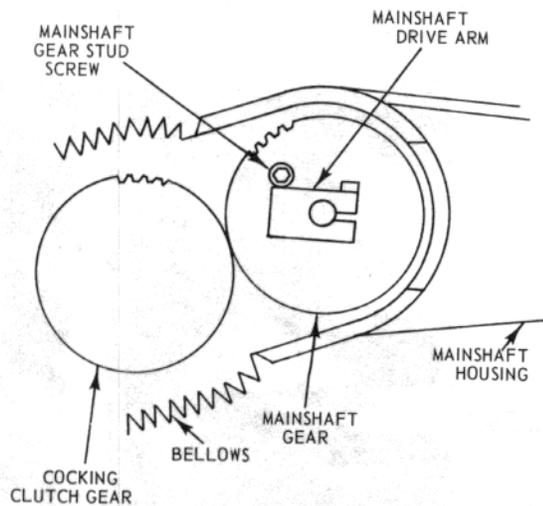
Mainshaft Gear Stud Screw Contacting Mainshaft Drive Arm
